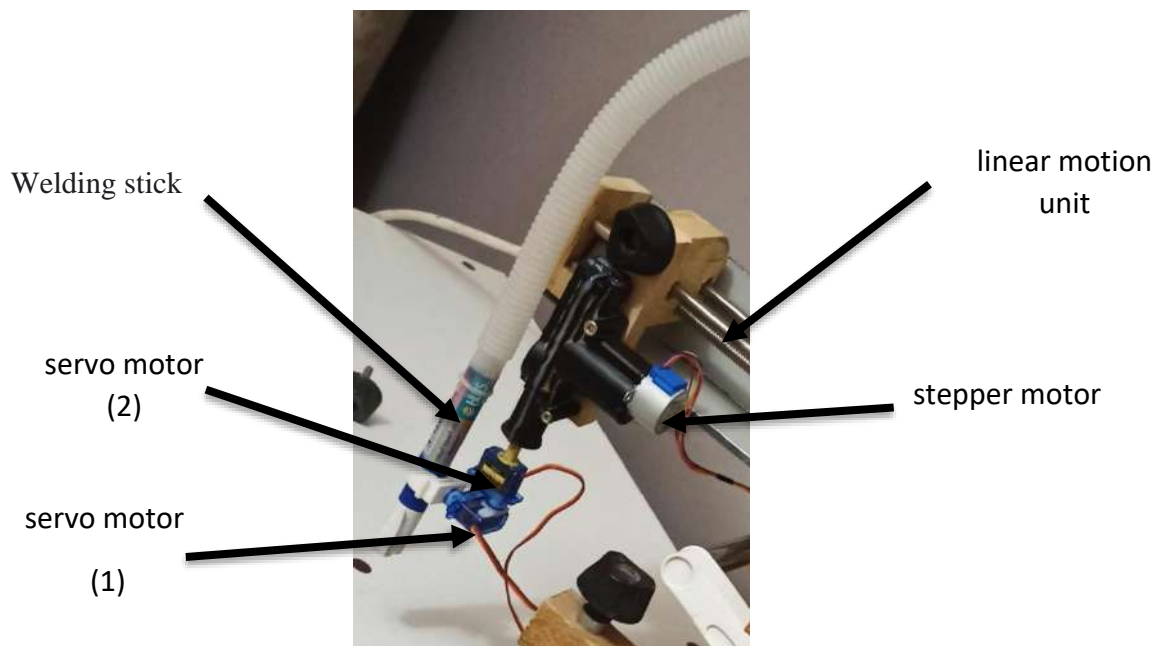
Illustrative image of a welding torch holder.
